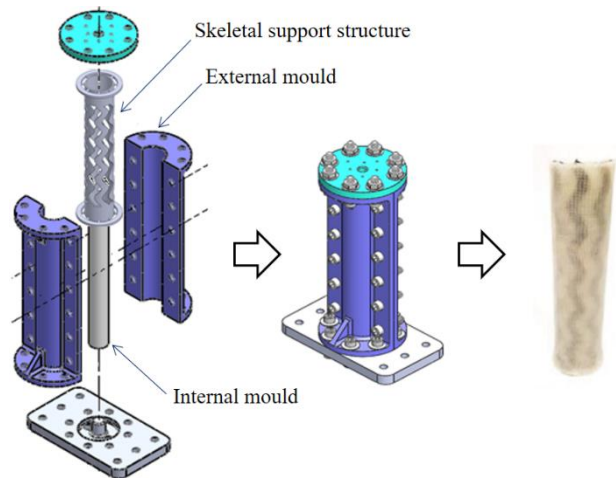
Mock aorta casting process. On the left, the exploded view, followed by the isometric view of the mould assembly and on the right, the casted silicone model.
